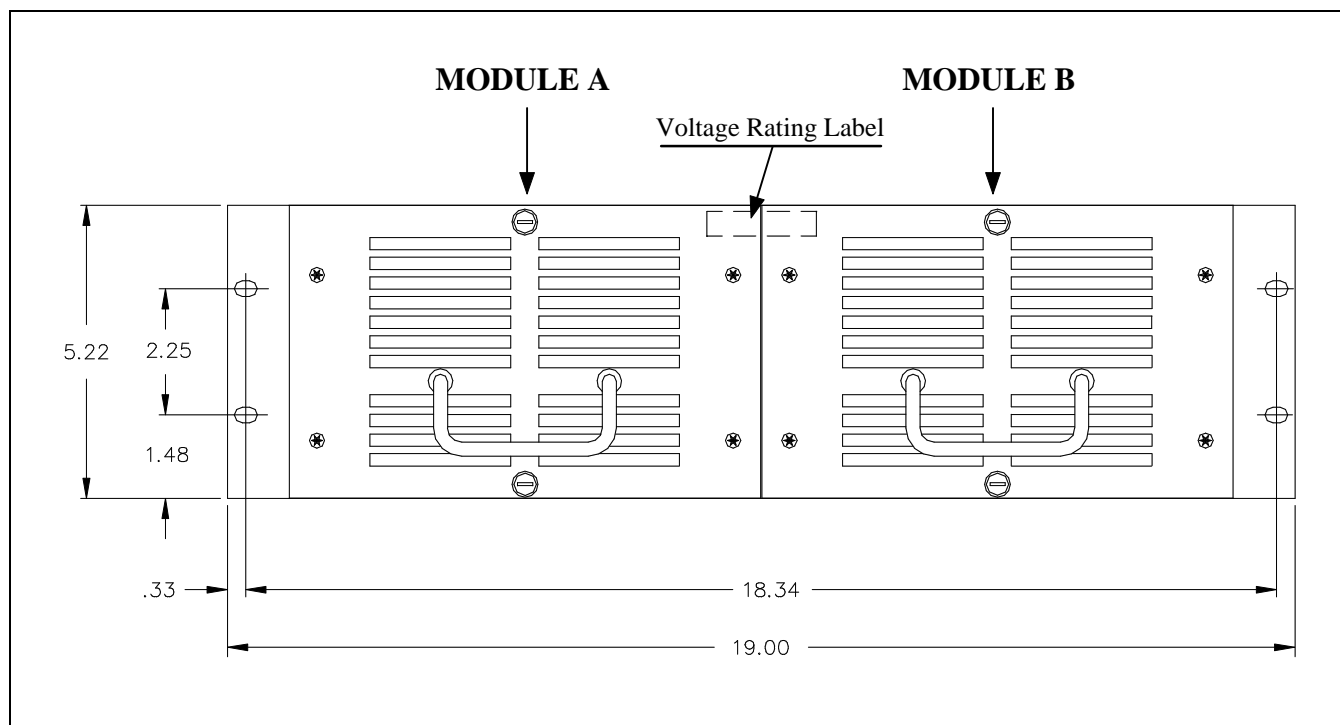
350A1441P1 & P2 Power Module Chassis (Front View)
